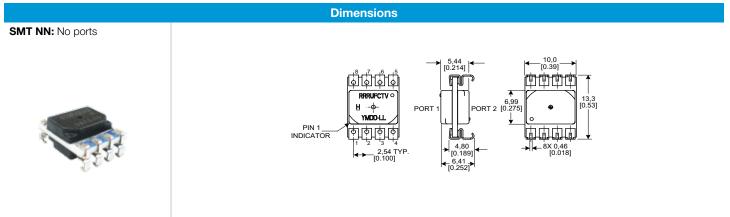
SMT Package Dimensional Drawings (For reference only: mm [in])
